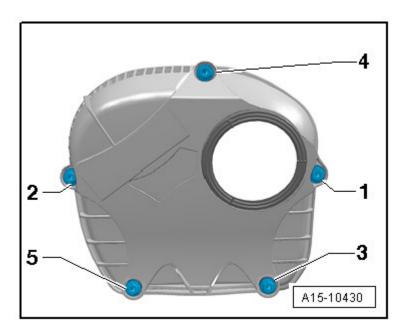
Identifying Upper Timing Chain Cover - Tightening Sequence
